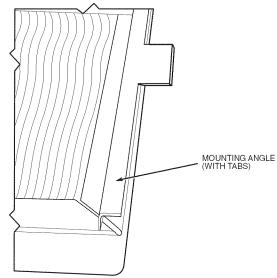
Mounting Angle (With Tabs) Attached to Filter Track Assembly
